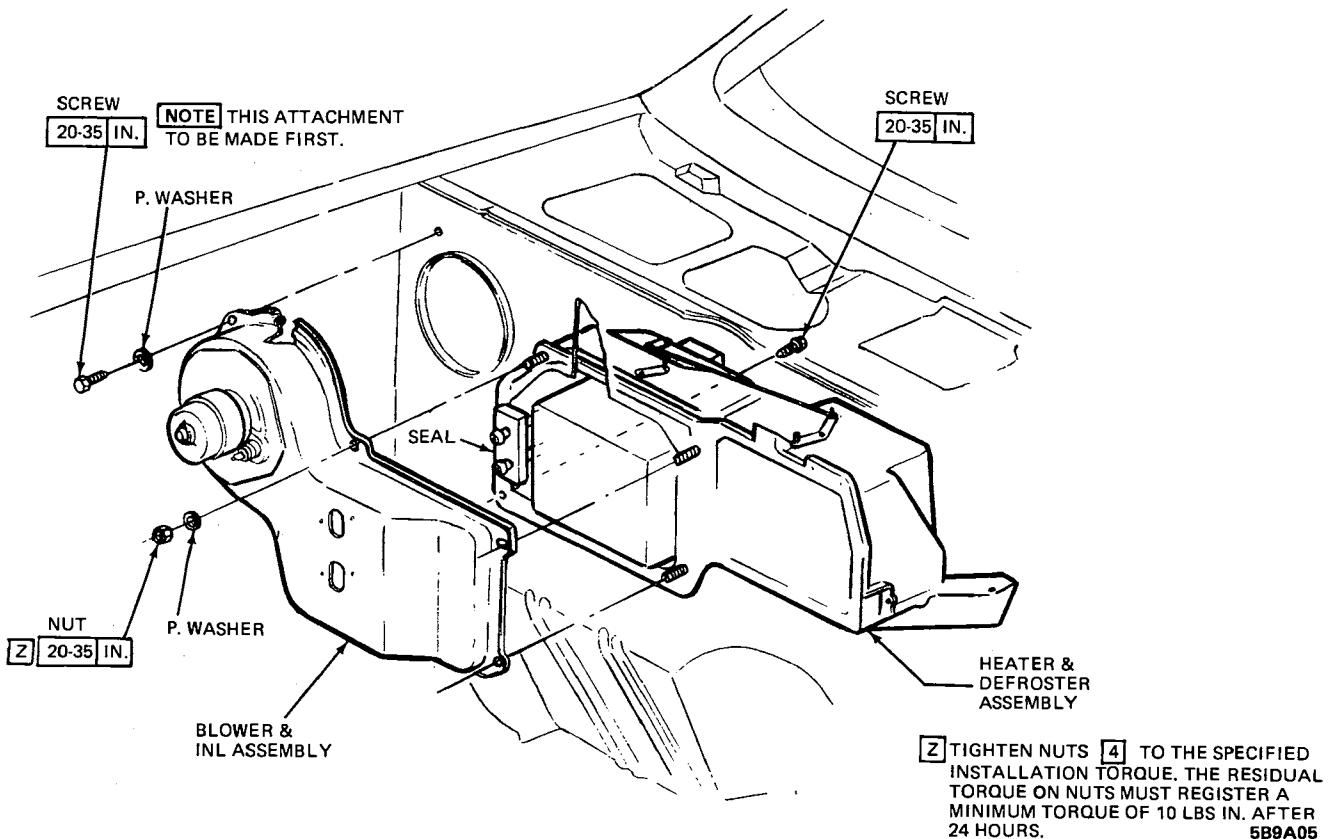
A-10 - Blower and Heater and Defroster Assembly - H Series
